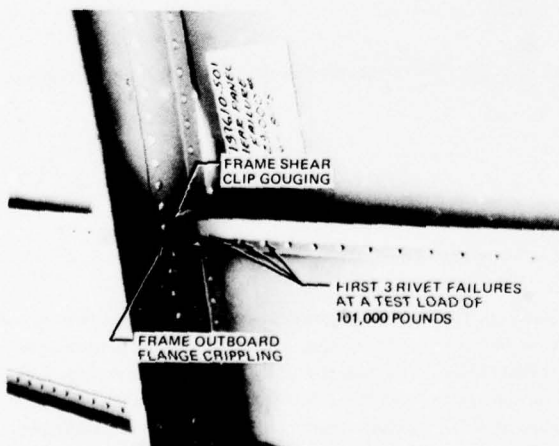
TEST FAILURES, RIVET PANEL - BACK VIEW
